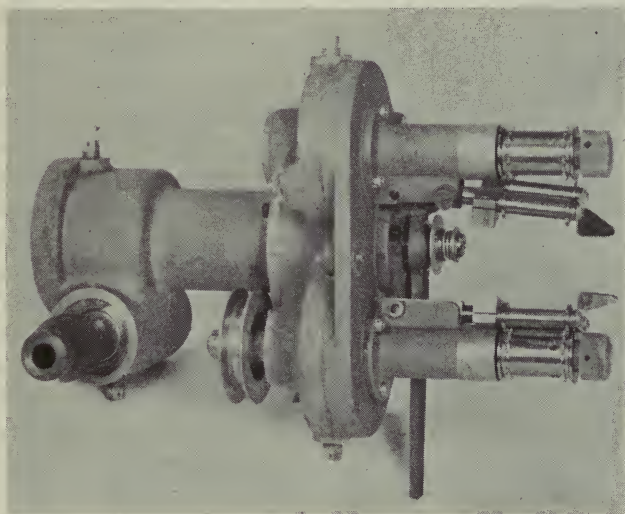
Complete drive-unit assembly from motor coupling to sprockets. Vertical lever releases built-in clutch for threading release.
